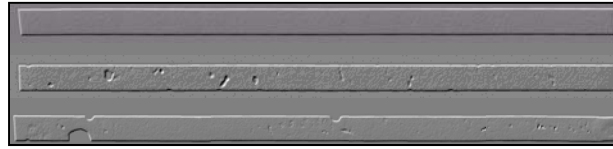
X-Ray Inspection of Solder Test Specimens (Good and Bad Samples)
